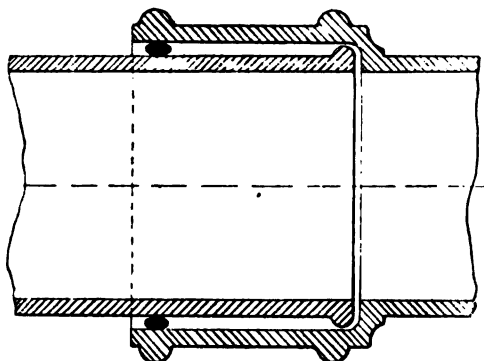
Socket Joint for Low-Pressure Pipes.
